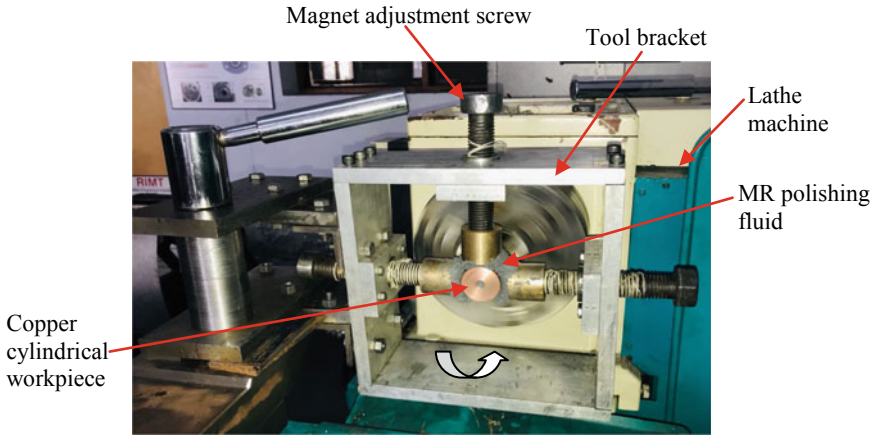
Actual photograph of an experimental setup during finishing of copper cylindrical workpiece
